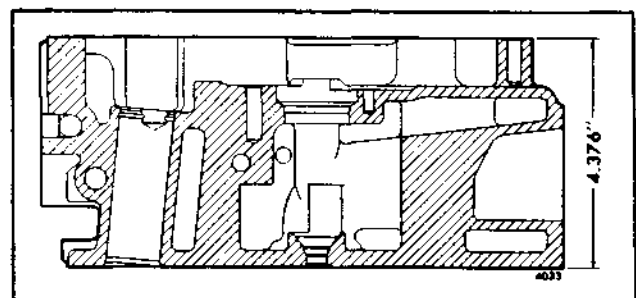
Minimum Distance Between Top and Bottom Faces of Cylinder Head
